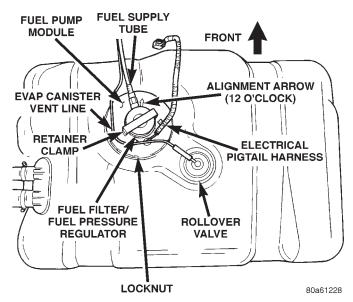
Top View of Fuel Tank and Fuel Pump Module
